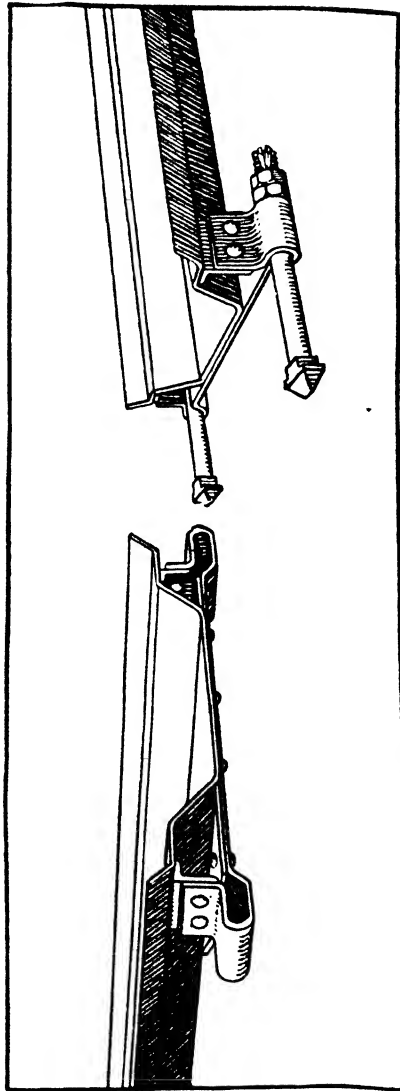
SHOWING METHOD OF CONNECTING TROUGHS IN A SHAKER CONVEYOR.
